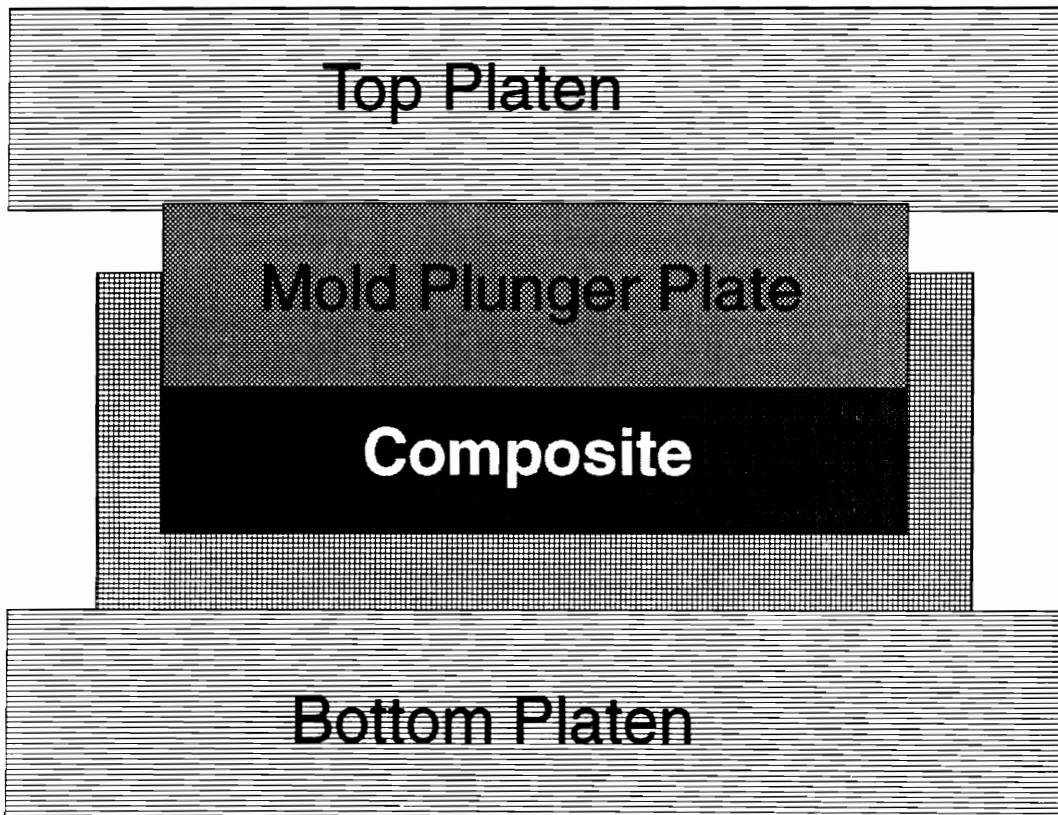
Schematic of metal mold for composite manufacture in a hot-platen press.
